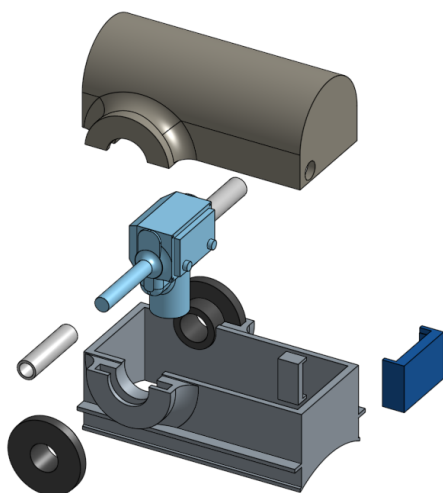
3D exploded schematics of the hardware used to house the accelerometer board and the pendulum.
